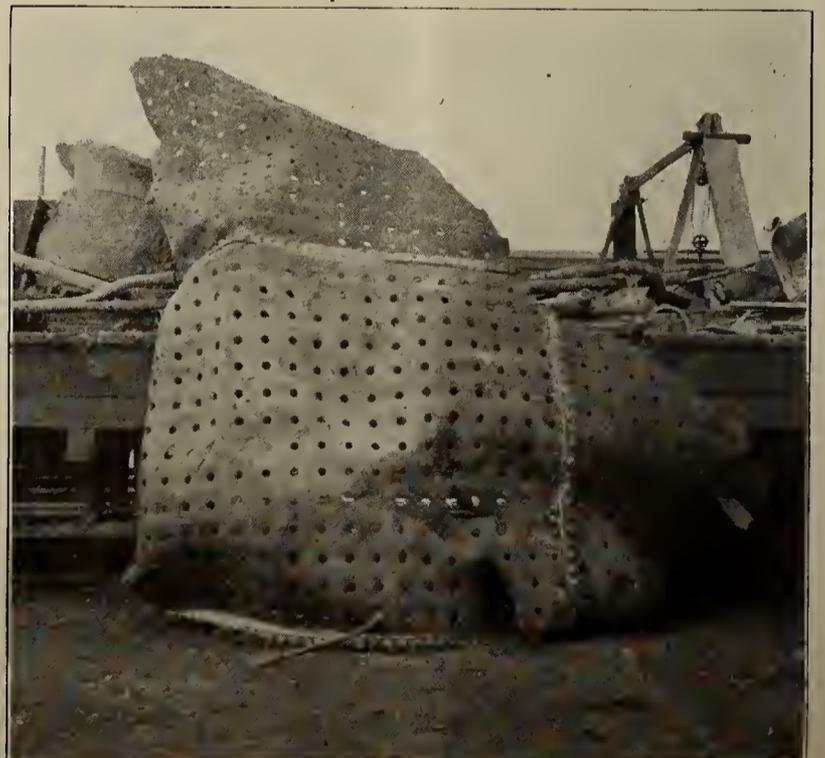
CROWN SHEET WITH PORTIONS OF DOOR AND SIDE SHEETS.
